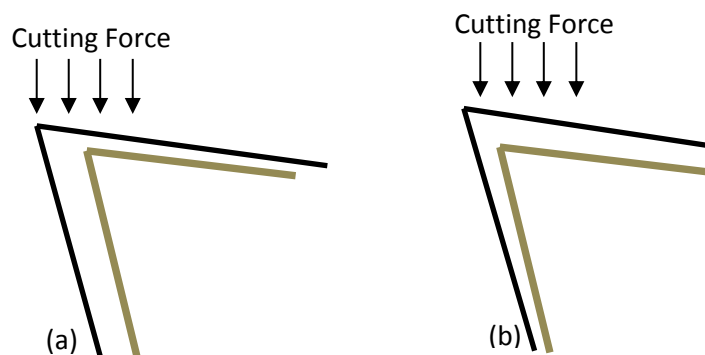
Coating target for cutting edge (a) Flank biased (b) Rake face biased
